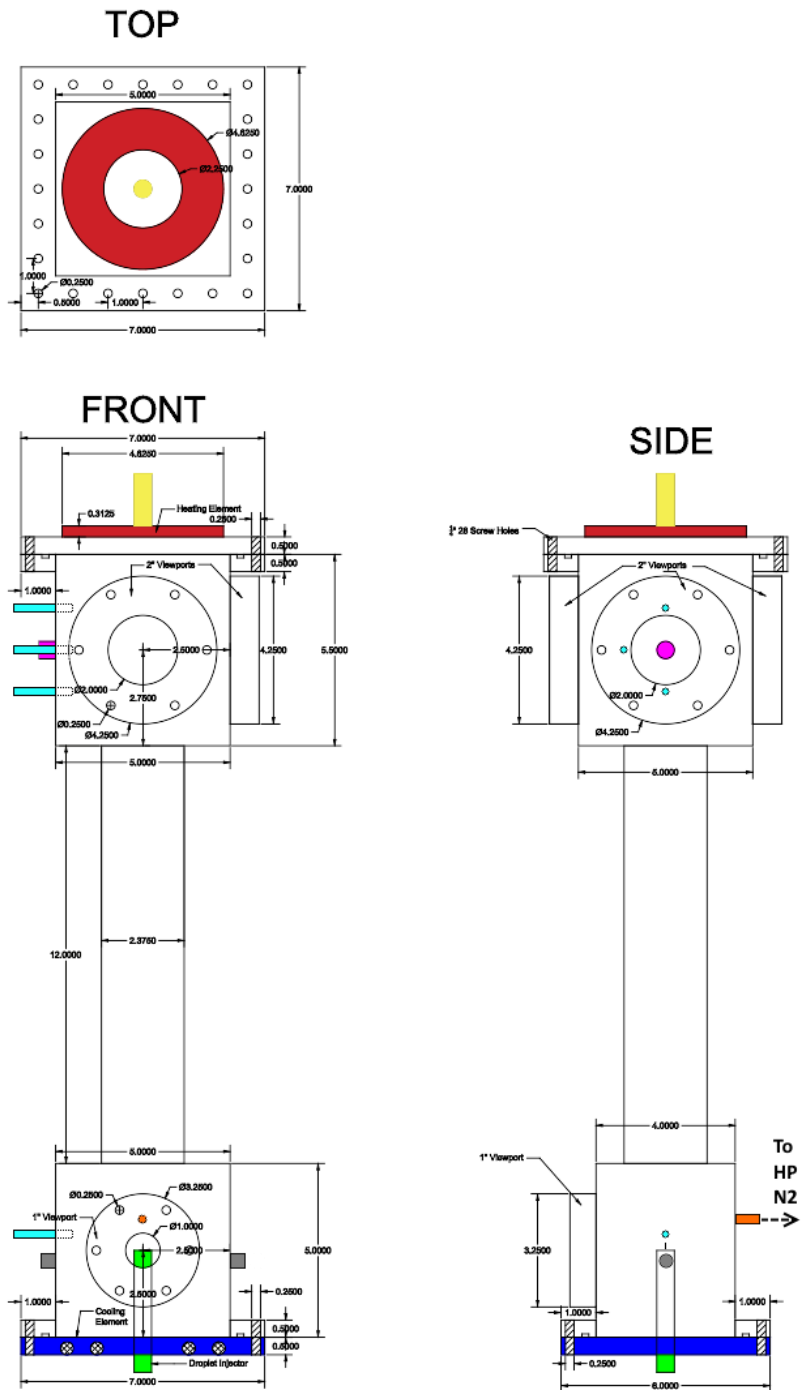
Technical drawing of the droplet column showing top, front, and side views. Yellow shows the location of the top plate piping with exhaust port, pressure gauge, and emergency pressure-relief valve attached but not displayed on this diagram. Red shows the location of the ring heating element. Turquoise shows the location of the thermocouples. Magenta shows the location of the pressure transducer. Orange shows the location of the high pressure nitrogen gas inlet. Green shows the location of the droplet injector. Blue shows the location of the cooling plate. Grey shows the location of the droplet injector LEDs. All measurements are in inches.
